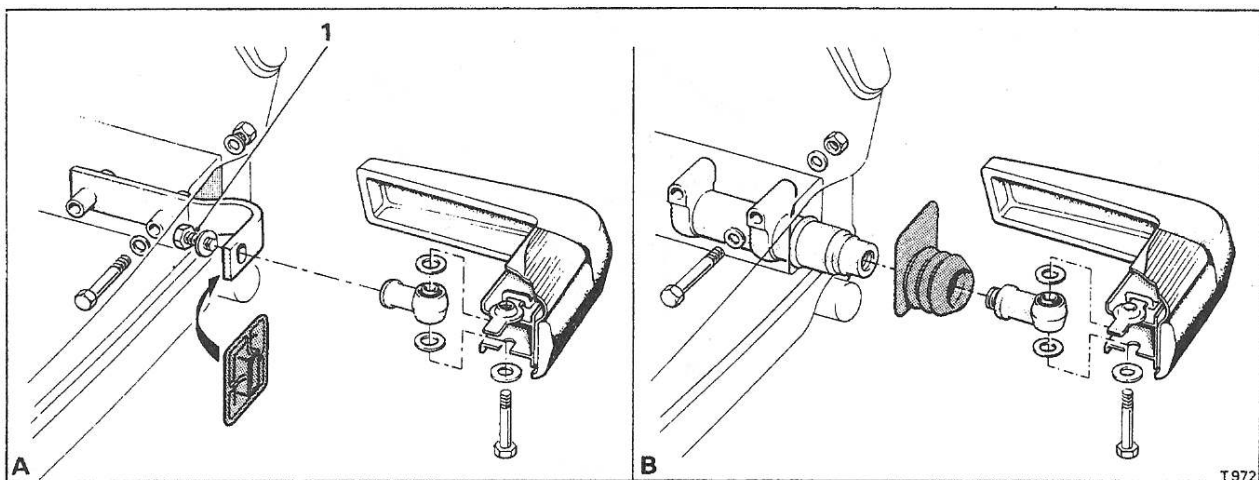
Rear bumper assembly (Corniche cars from car serial number 50 001)
